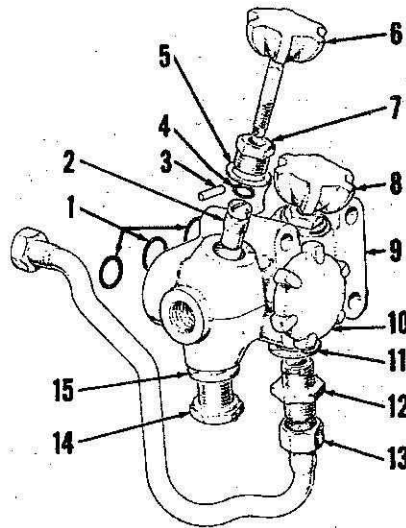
Exploded view of early type three-way valve assembly used on early models 770, 880 and 990.
